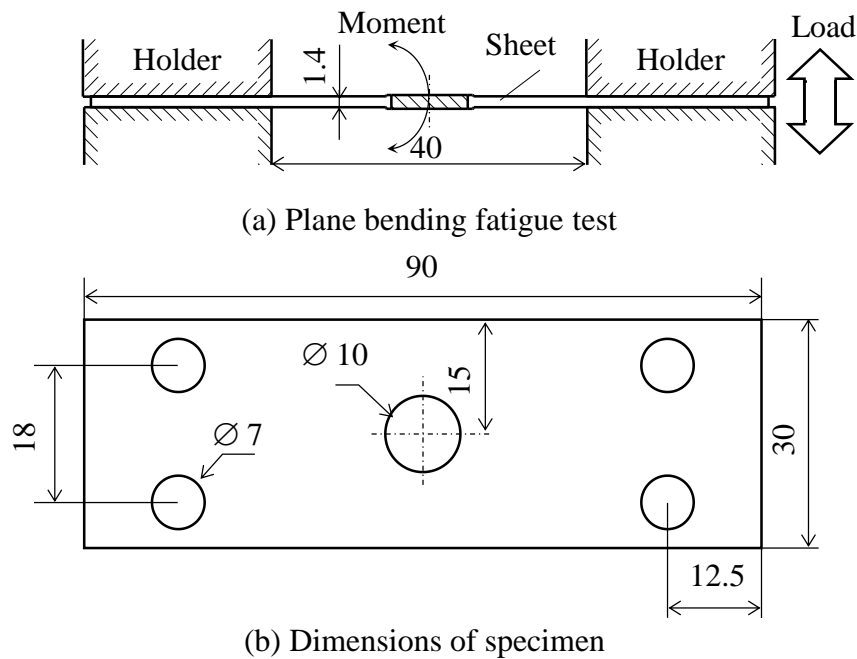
Procedure and dimensions of specimen for plane bending fatigue test.
